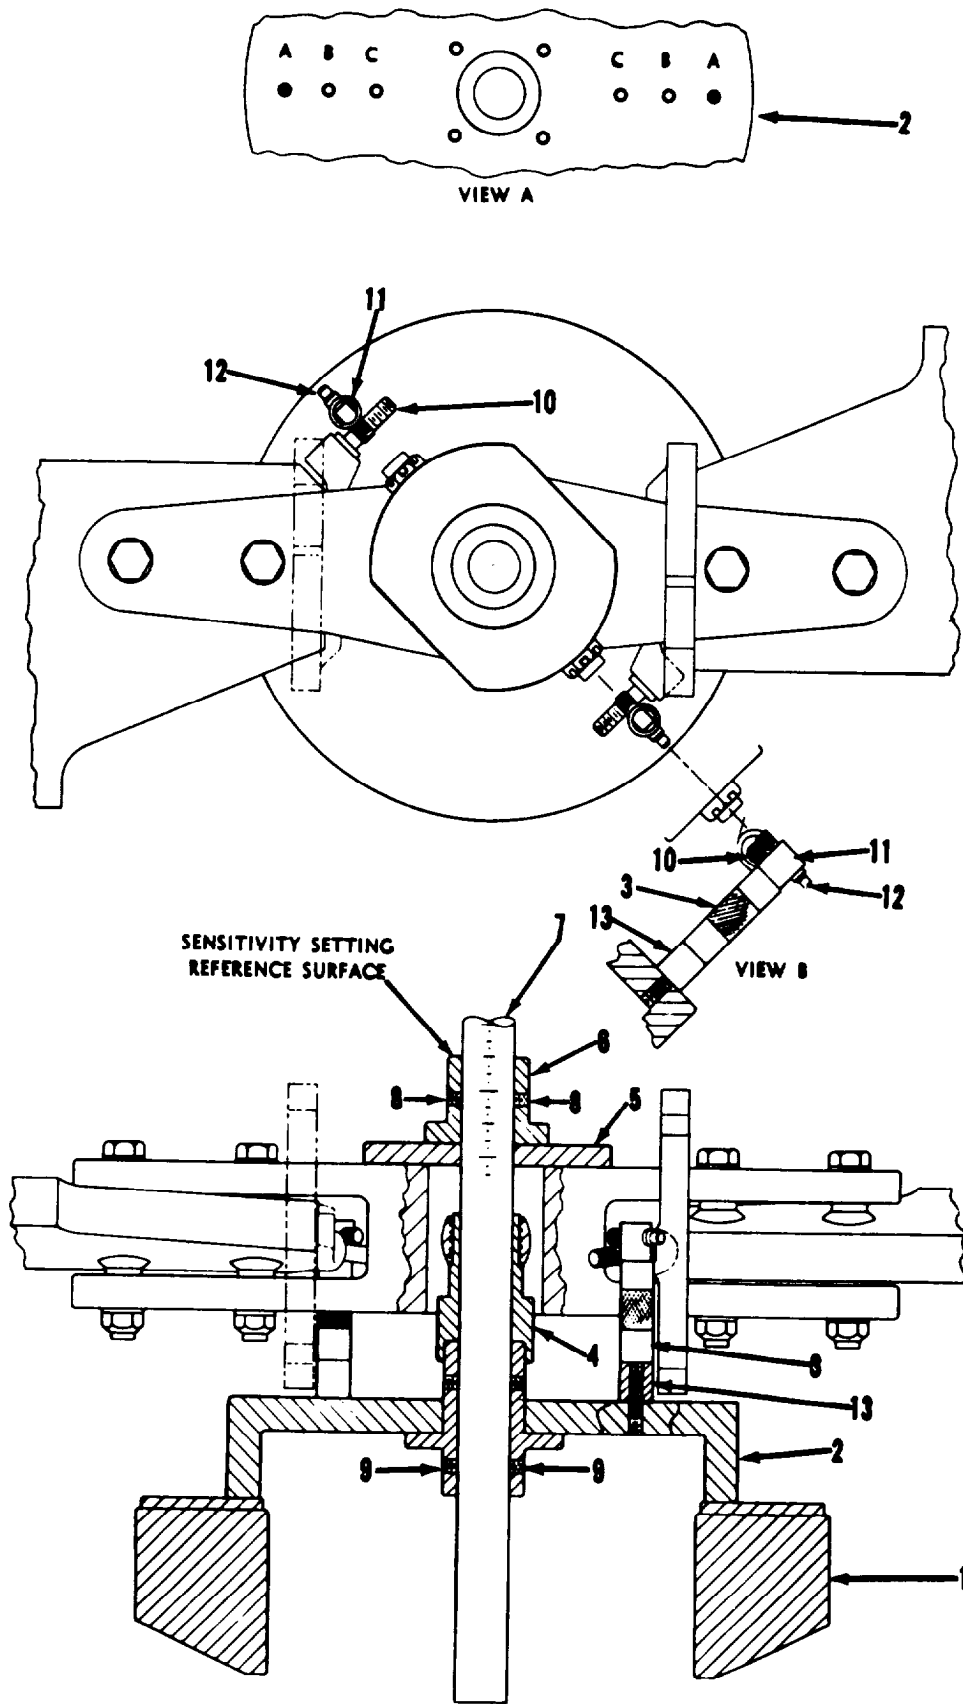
Balancer Installation - OH-58 Series Tail Rotor Hub and Blade Assemblies (Typical)
